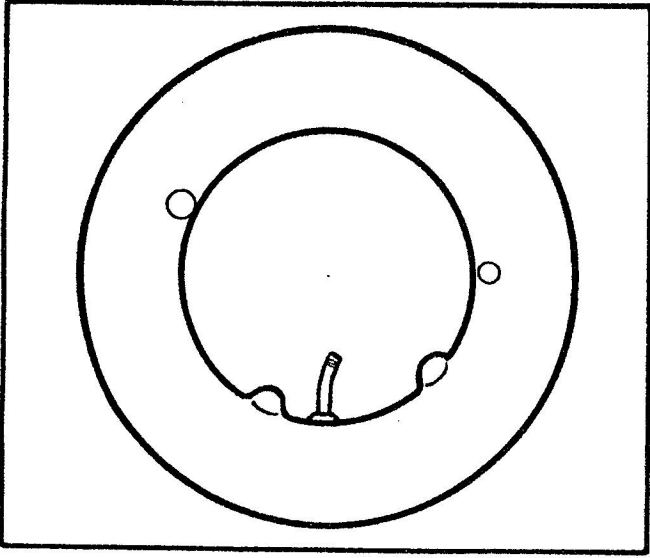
Blisters Due to Trapped Air Under Fabric Bases
